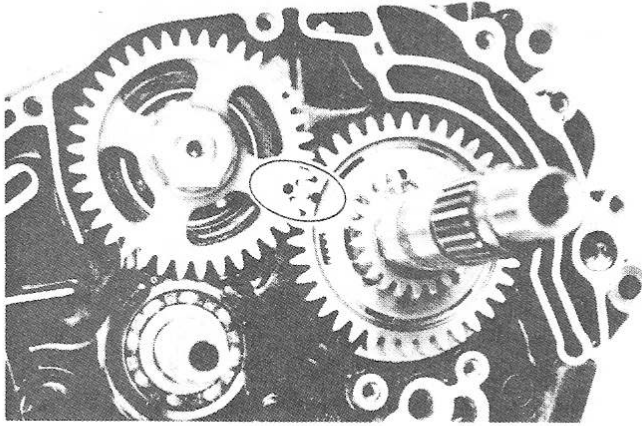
B.49 Align the punch marks on the gears before inserting the key in the balancer shaft (Sec 24)
